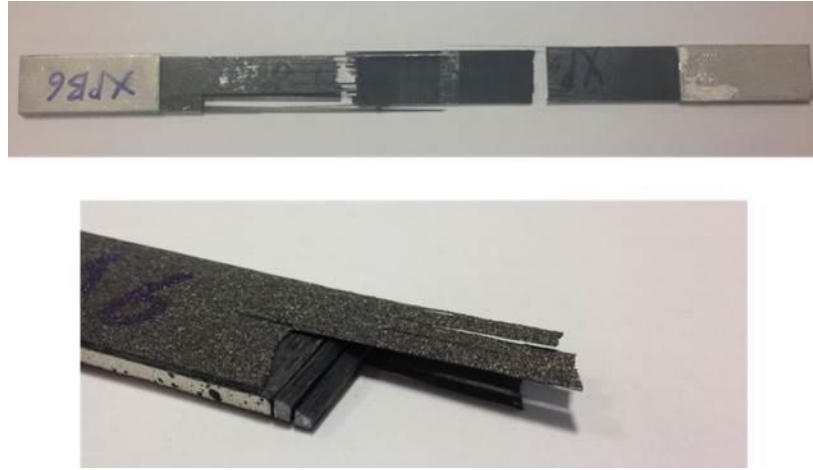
Typical IM7/8552 CF cross-ply laminate failure modes
